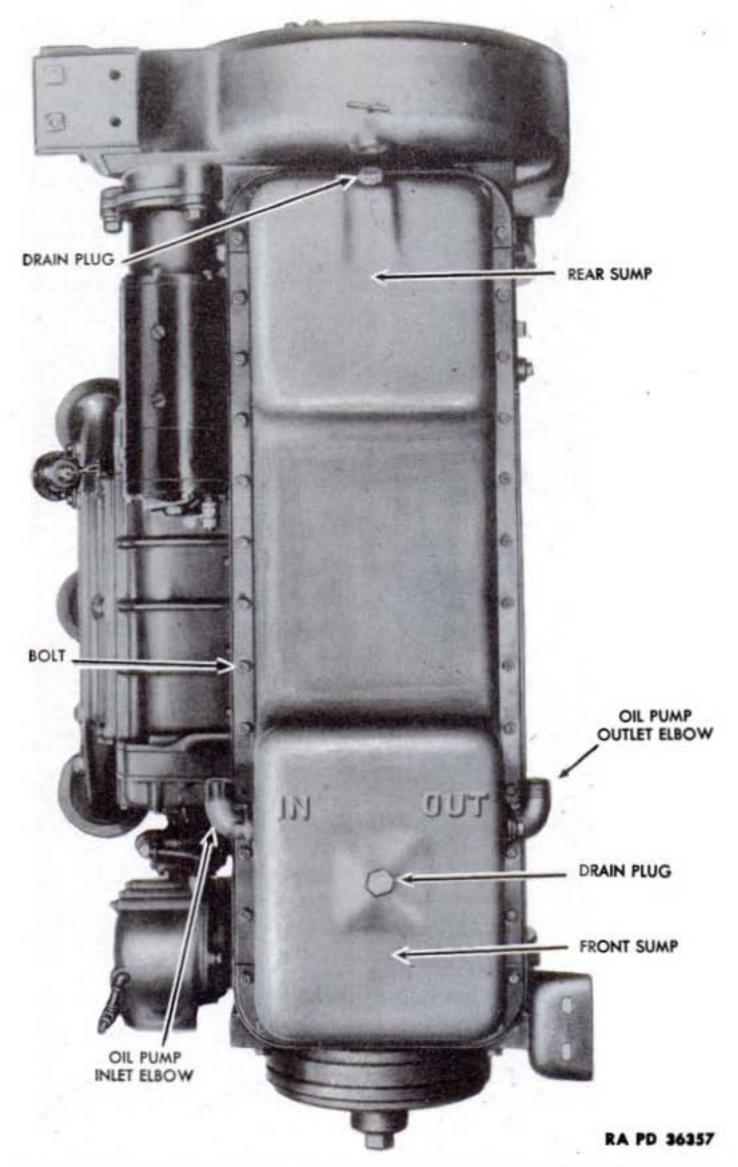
Bottom View of Engine Oil Pan (Dry Sump Engine)
